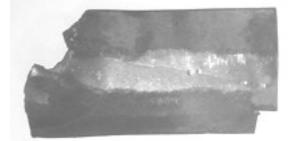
Grinded curved surface of pellet torch body after hardness measuring
